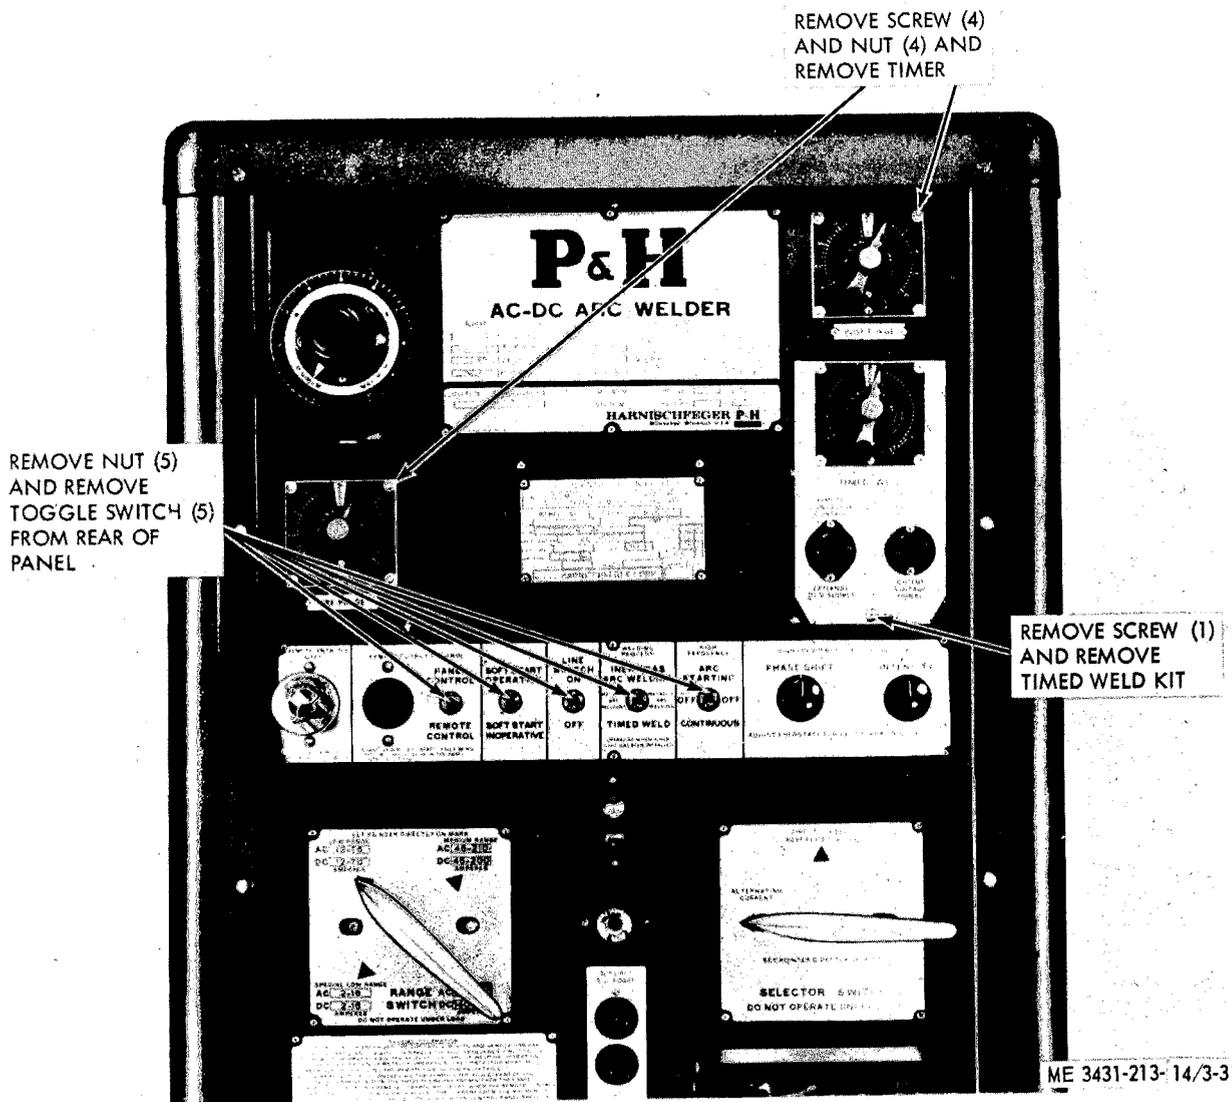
Upper control panel components, removal and installation, Model 2100H2007.
